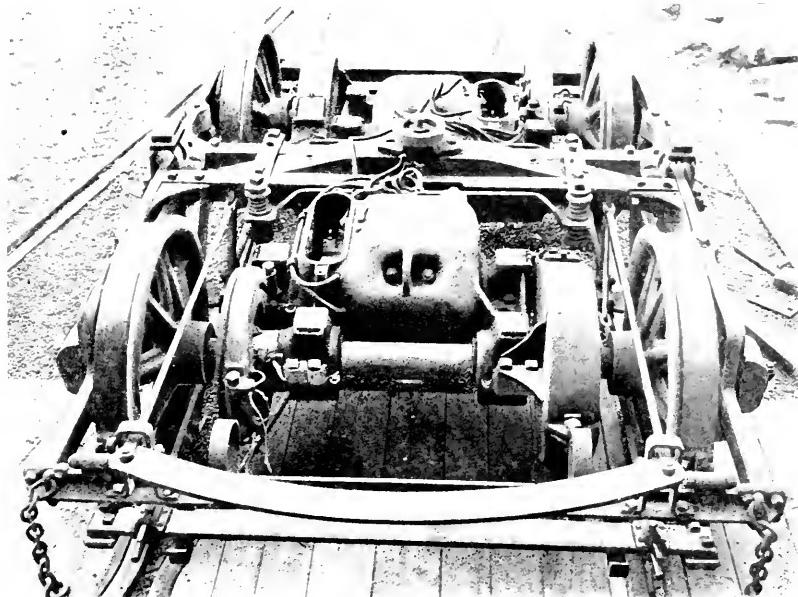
VIEW OF ELECTRIC RAILWAY TRUCK WITH ONE MOTOR ON EACH AXLE AND PROVIDED WITH MAGNETIC BRAKES.
